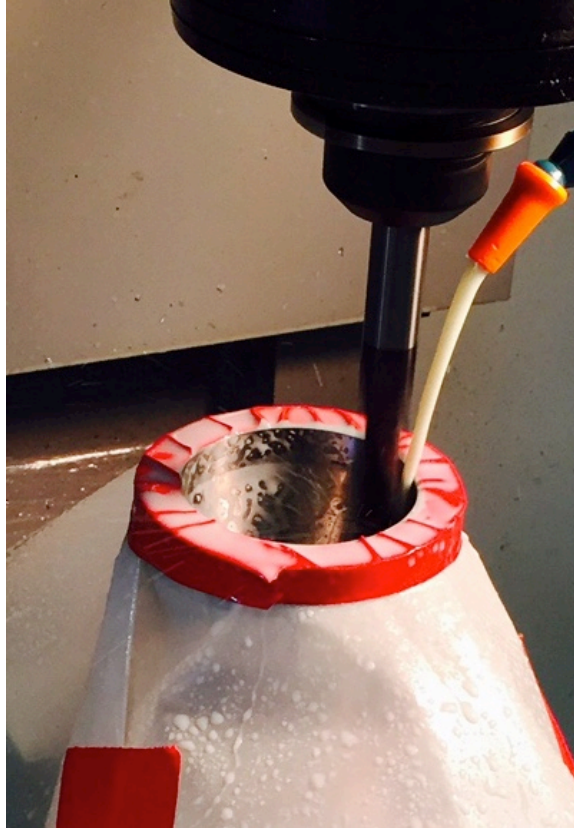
Removing the thermocouple plug guide length and machining the inner nozzle bore to the final profile on a Haas TM-1. The plastic shroud protects the nozzle body and thermocouple wires from exposure to the machine coolant.
